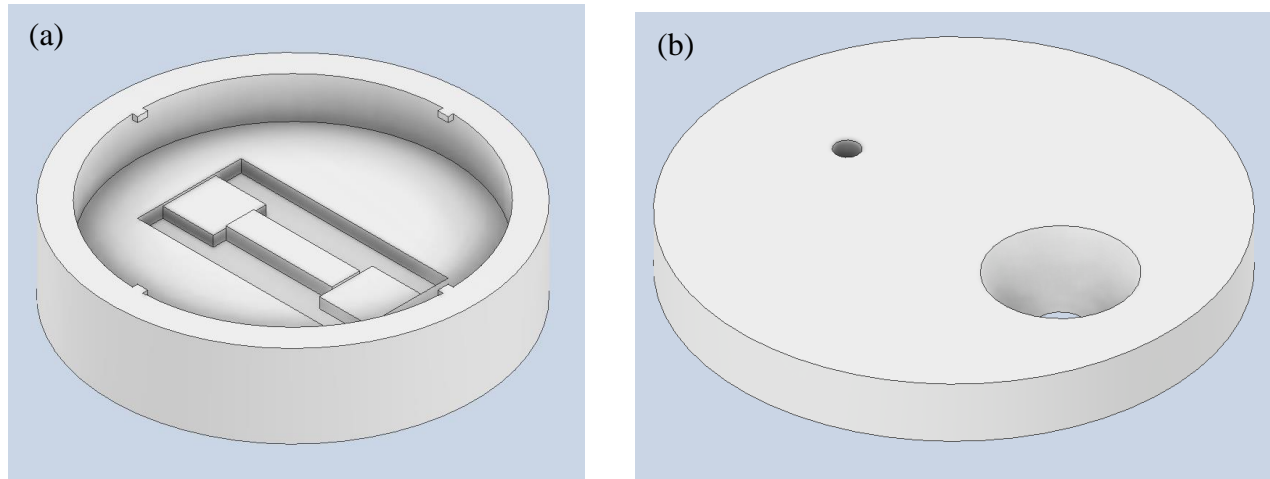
Assembly drawing of the original pump design. The MSM element is not included in this assembly.
